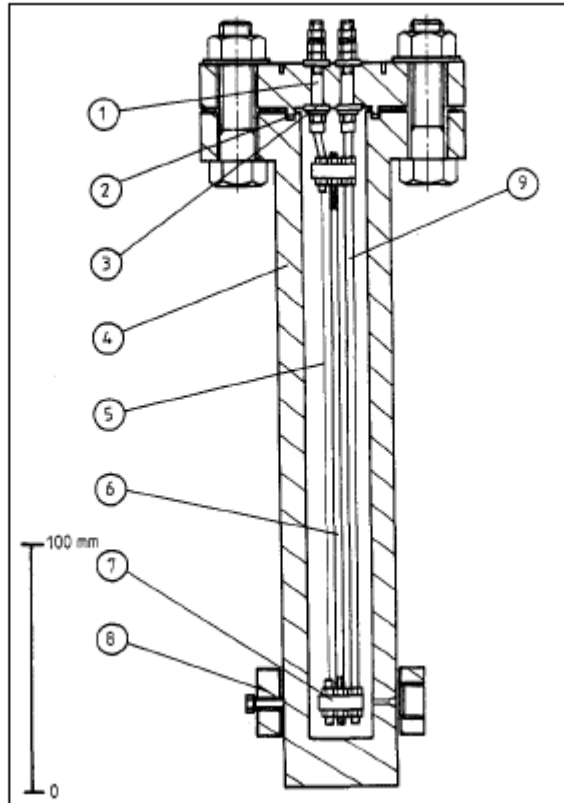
Hot Wire Assembly. The Components are 1- Terminal, 2- Cu Packaging, 3- Teflon Packing, 4- Pressure Vessel, 5- Insulated Pt Wire, 6- Sus Rod, 7- ABS Disk, 8- Grand Retaining Ring, 9- Insulated Cu Rod
